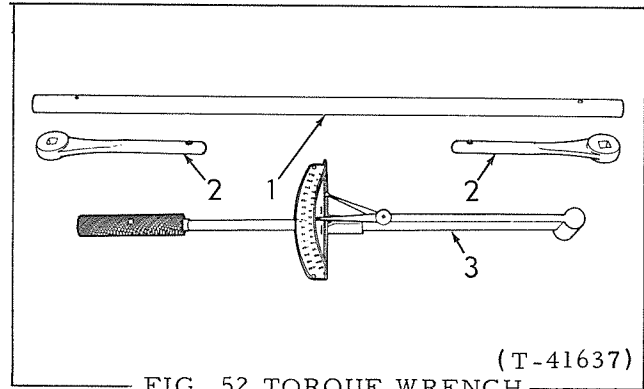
TORQUE WRENCH AND EXTENSIONS
